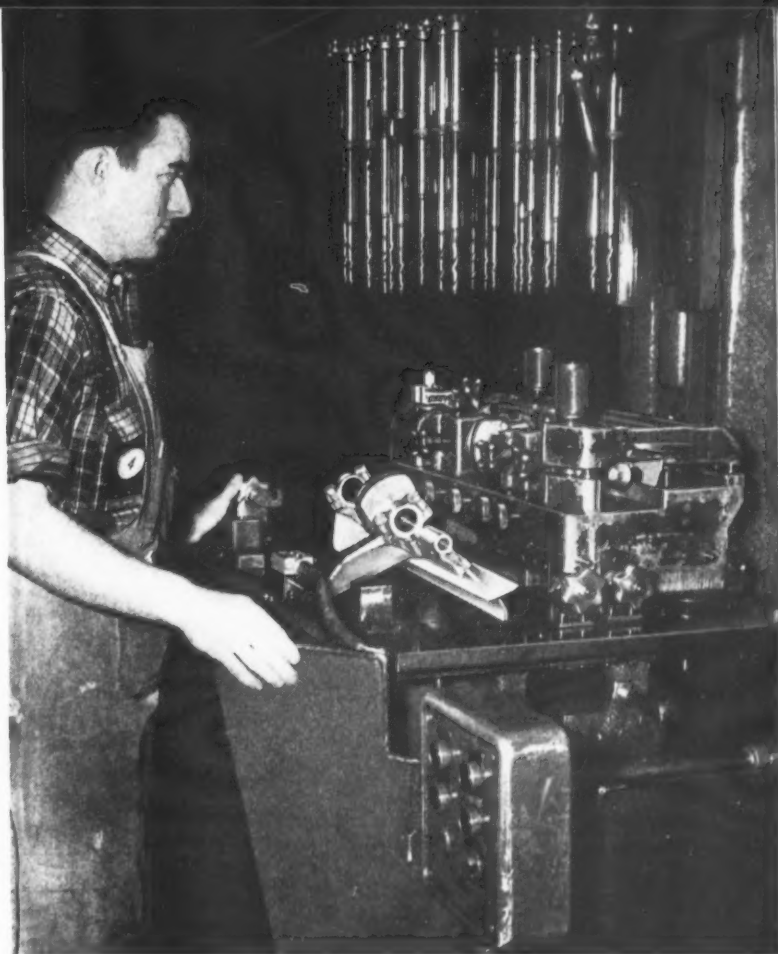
Close-up View of Jig Used in Drilling and Reaming Four Landing-gear Cluster Fittings. Four Parts Assembled in the Position in which They are Held for the Operation are Seen in Front of the Jig
